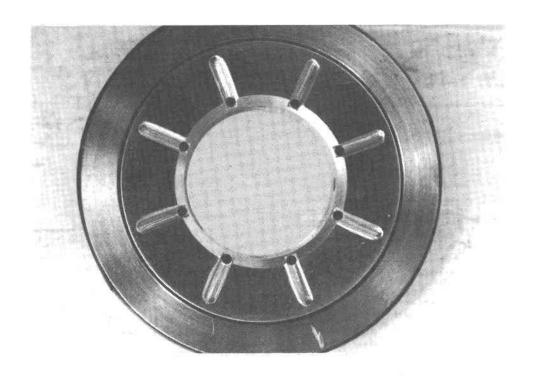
Externally Lubricated: Waukesha Five-Pad Tilting-Pad Journal Bearings and Fogg Flat Pad/Raleigh Step Thrust Bearings
